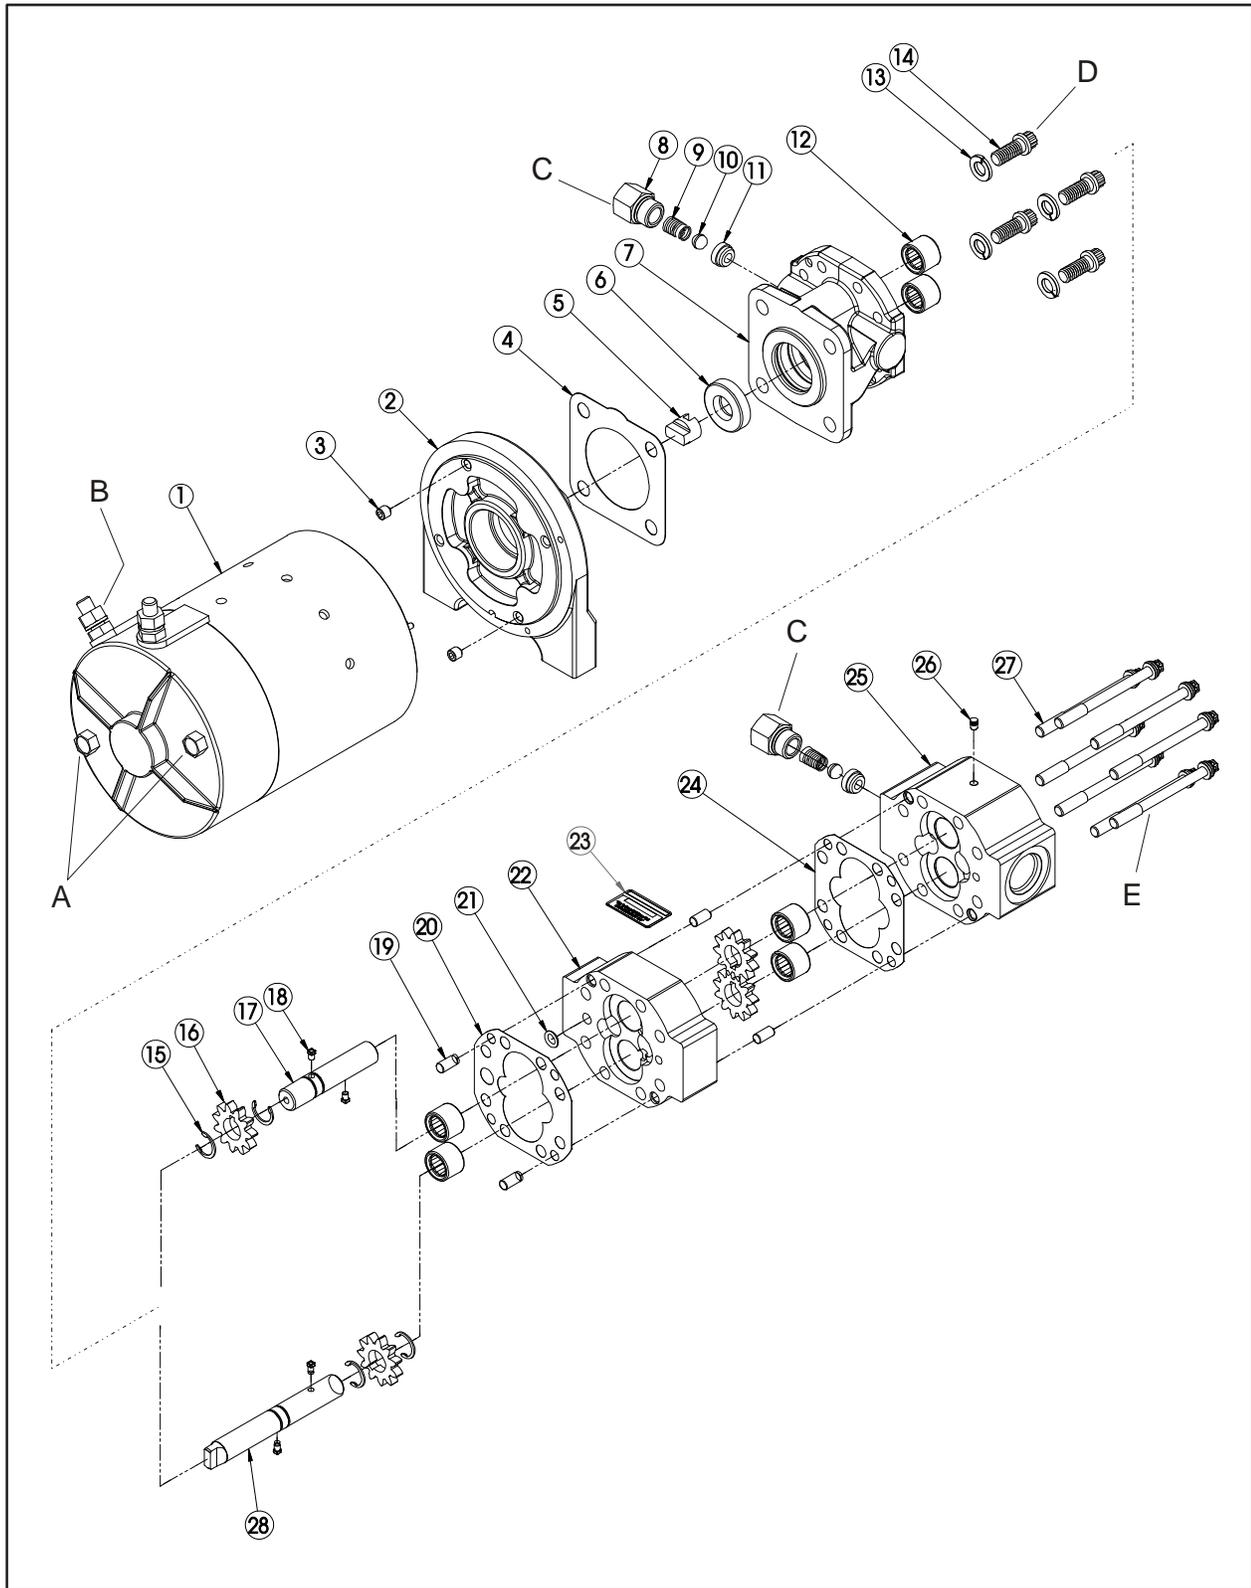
Auxiliary Pump - Sheet 1 of 2
